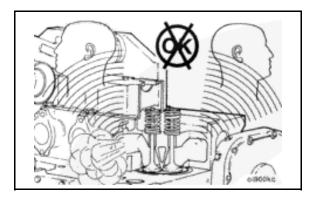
VALVE LEAKAGE SOUND FROM THE MANIFOLDS
